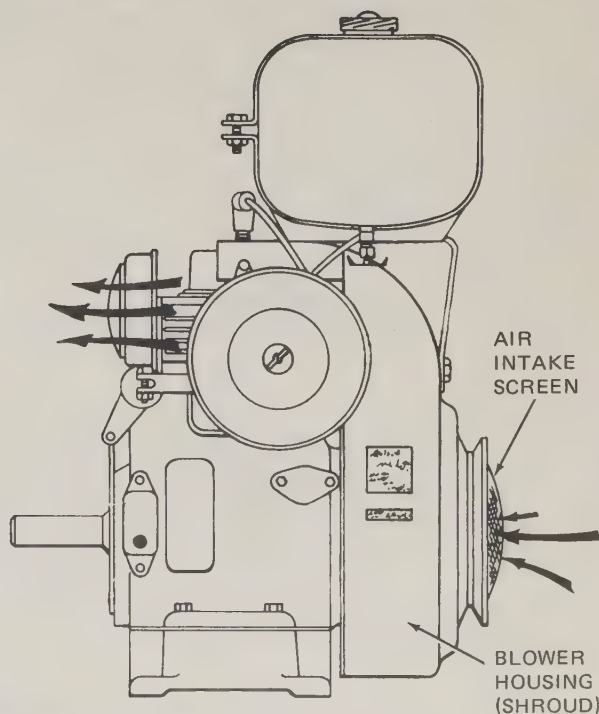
The blower housing must be removed and cleaned periodically. (Kohler Company)
